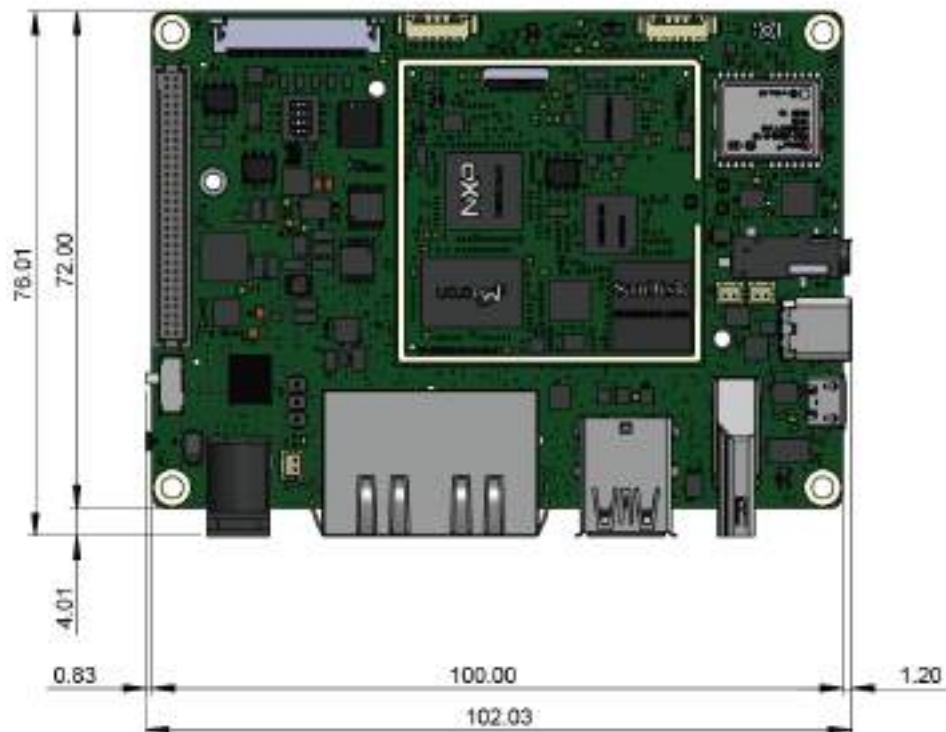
Mechanical Dimensions of i.MX 93 or i.MX 91 Pico ITX SBC Top View
